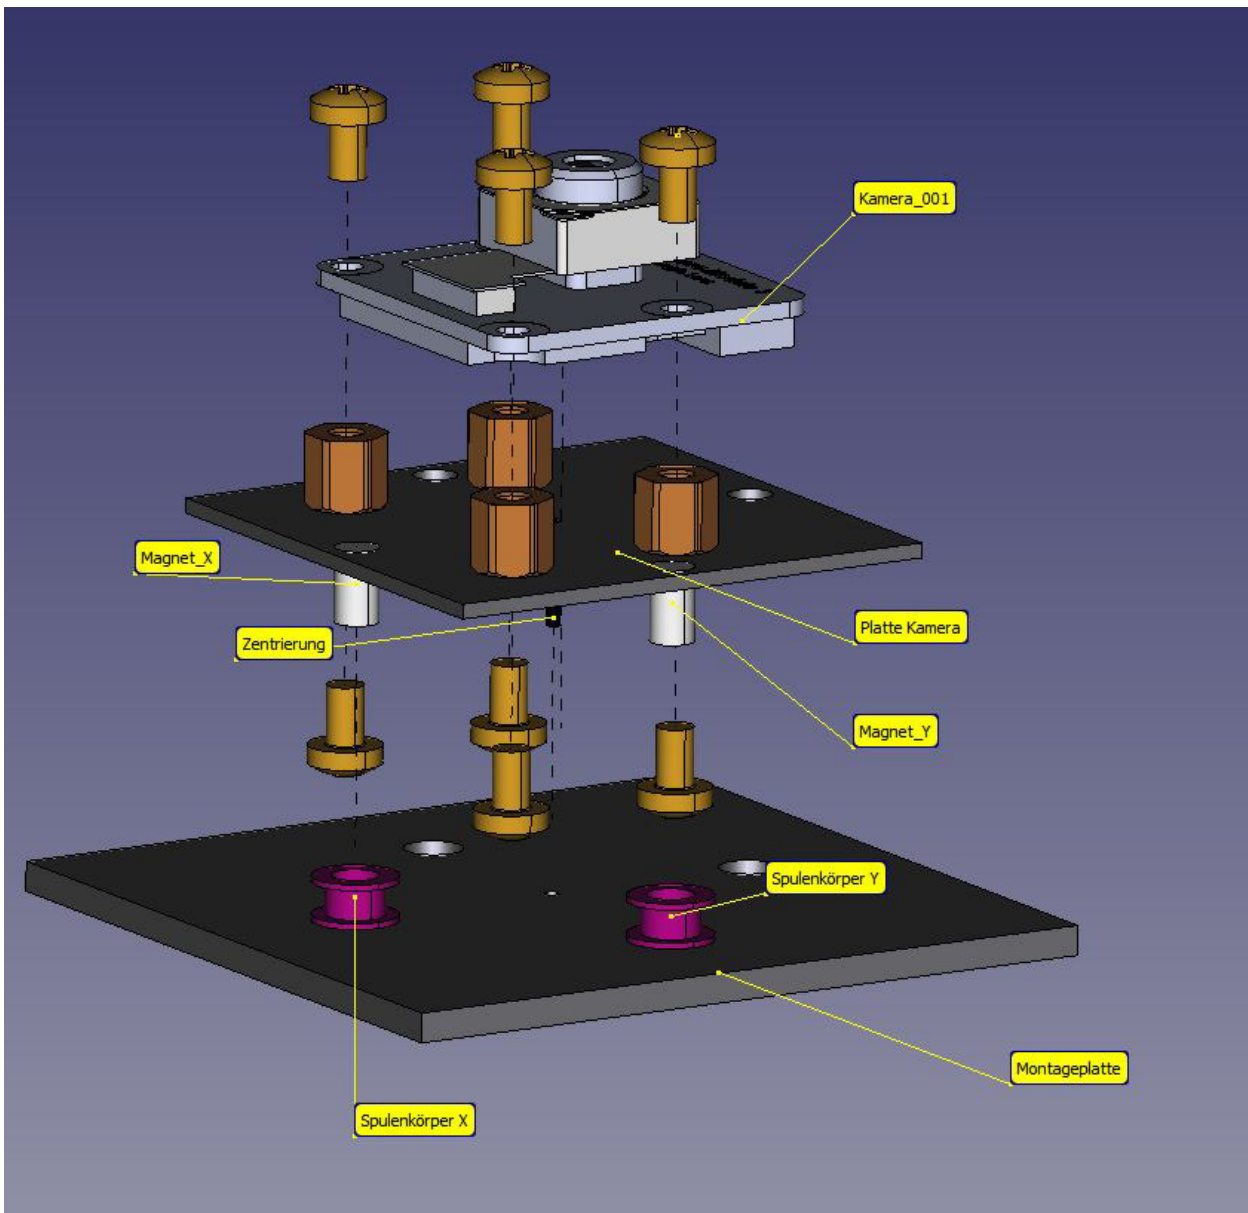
actors made of a magnet and a coil: explosion drawing. (drawing: Winfried Sembritzki)
